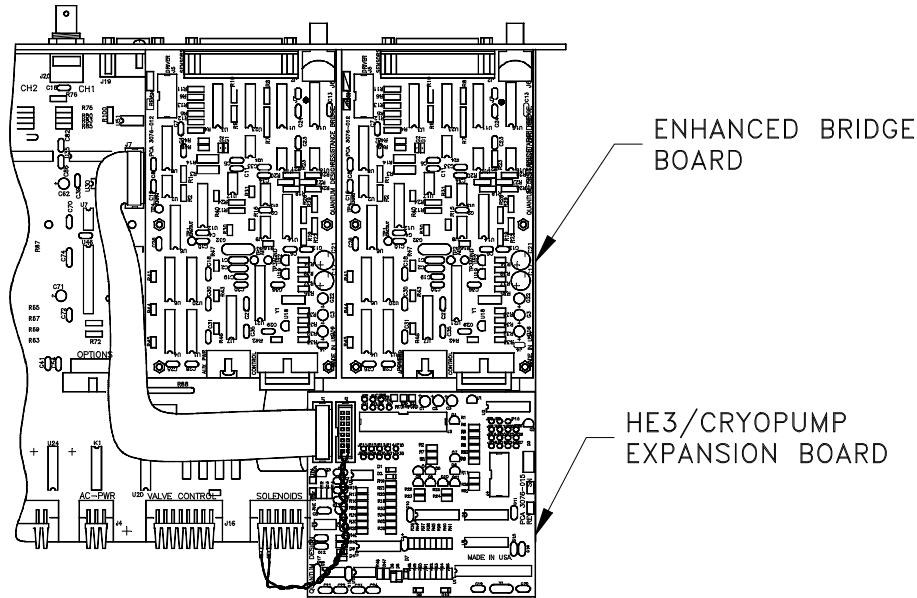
Expansion circuit board and enhanced user bridge board in Model 6000
